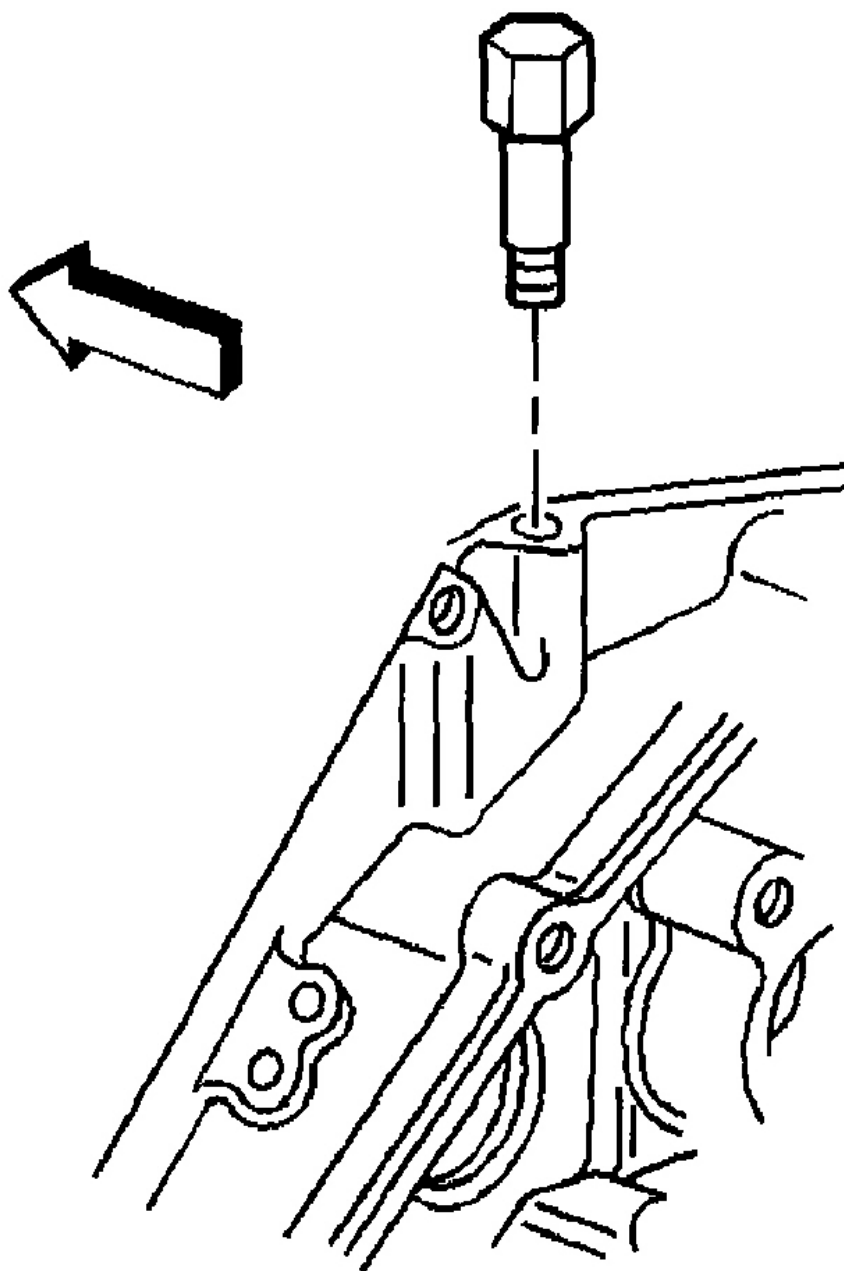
Removing Engine Oil Pressure Gauge Sensor Using J 41712
